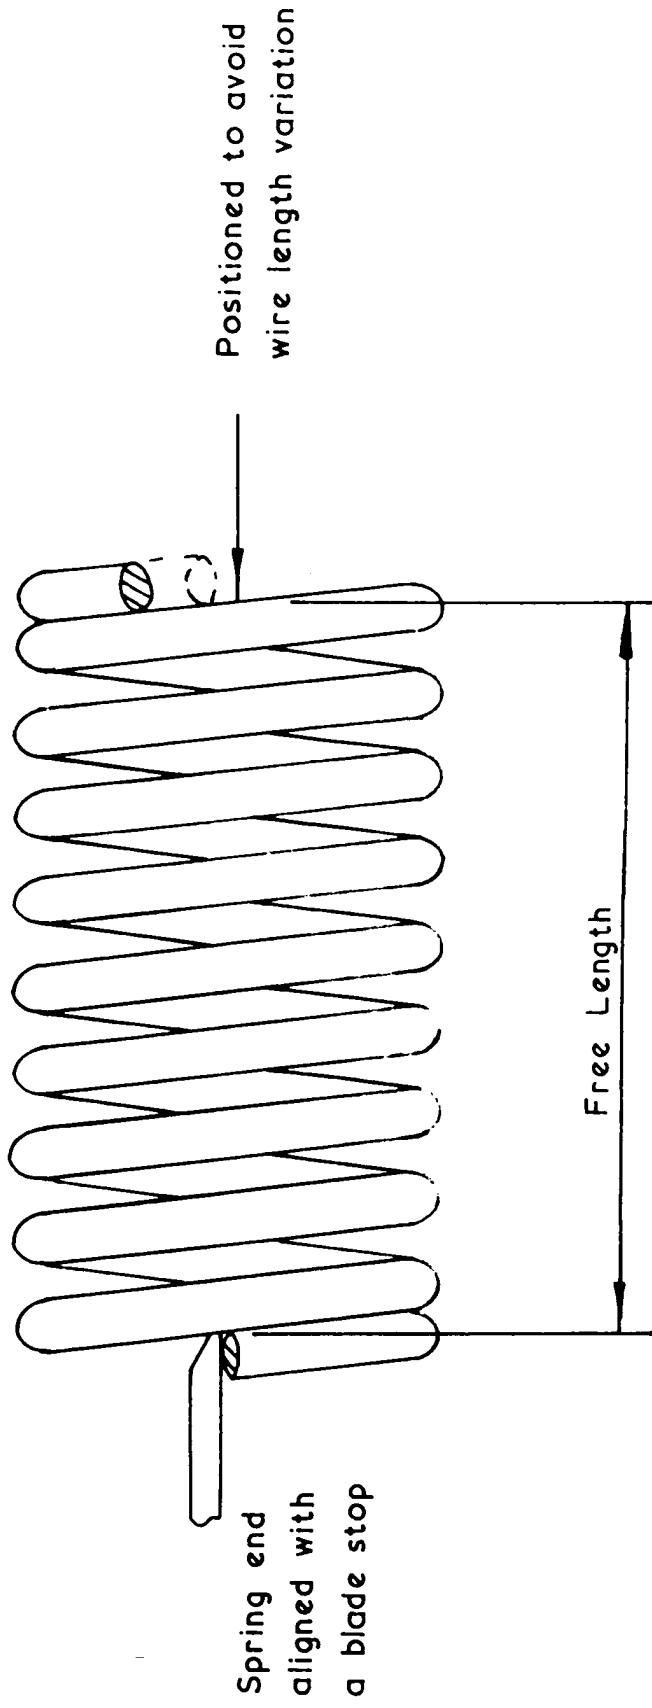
METHOD OF LOCATING SPRINGS FOR MEASURING
